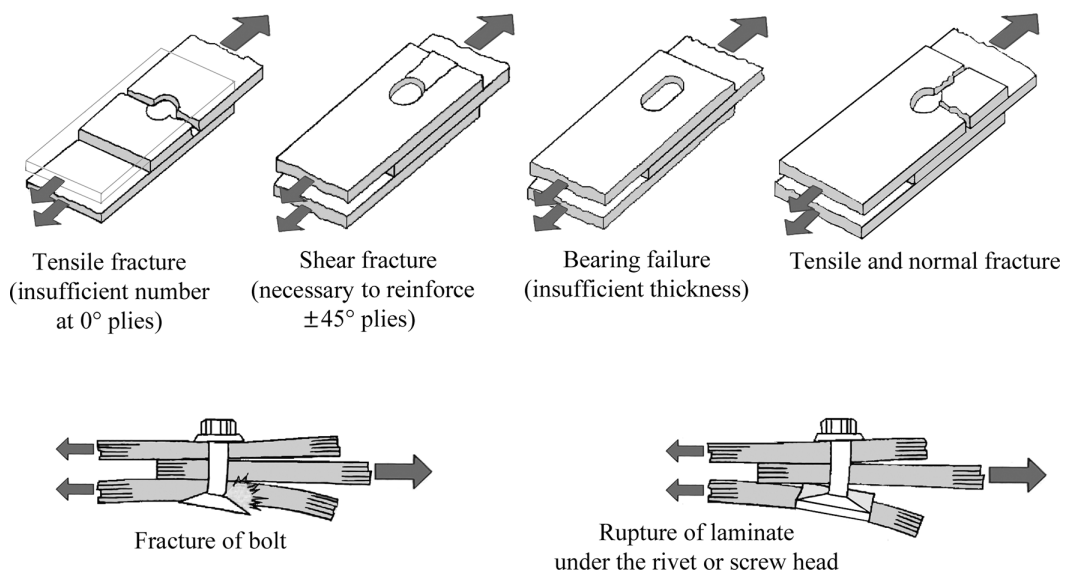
Main failure modes in bolted joints.
